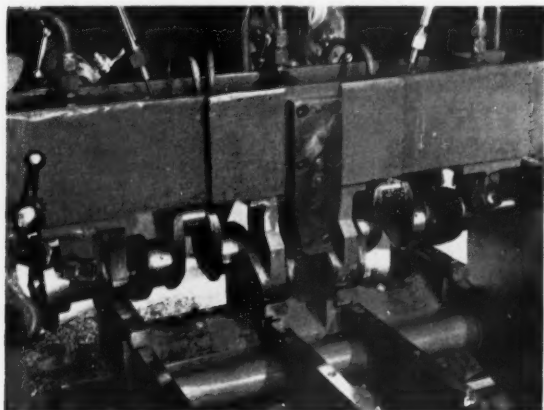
The simple but effective work fixture on the machine shown in Fig. 15
